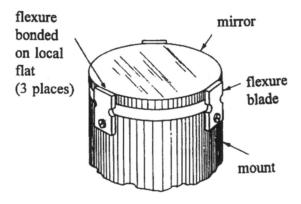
Sketch of a circular mirror mounting with axially directed, radially compliant flexures. (Adapted from Høg.²¹)
